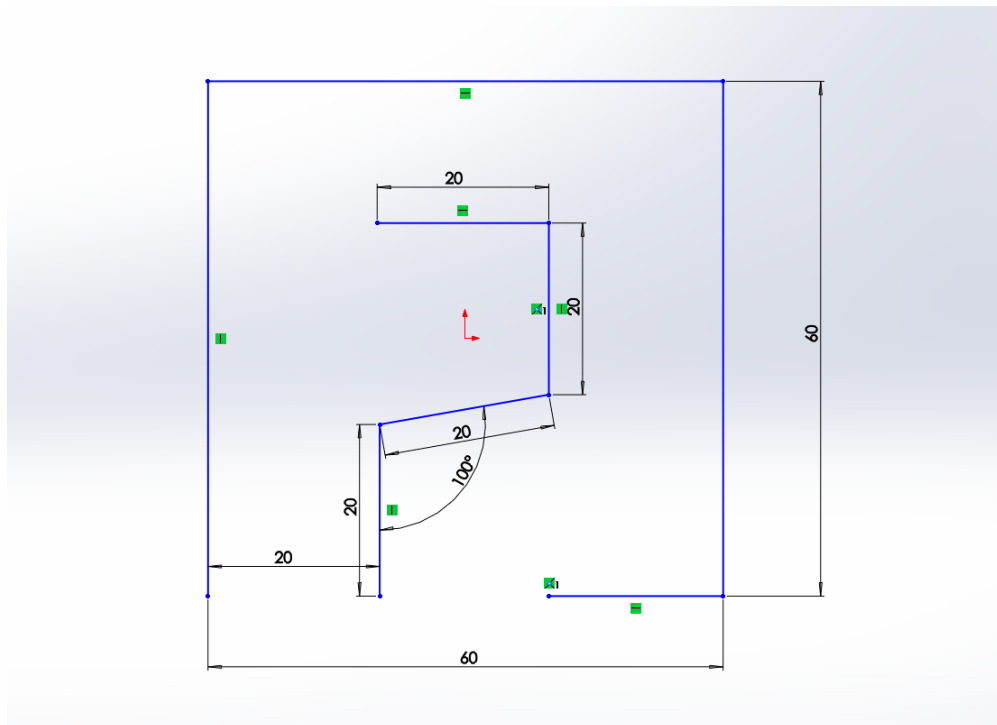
Sketch of the maze designed. (Dimensions are in cm)
